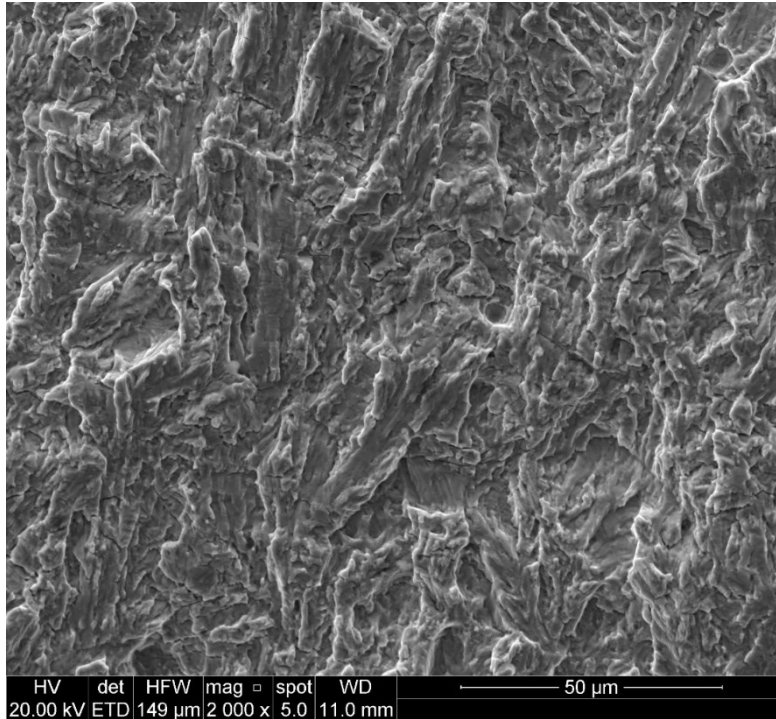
Detail of L3AB-2 fracture surface in the fatigue crack zone.
